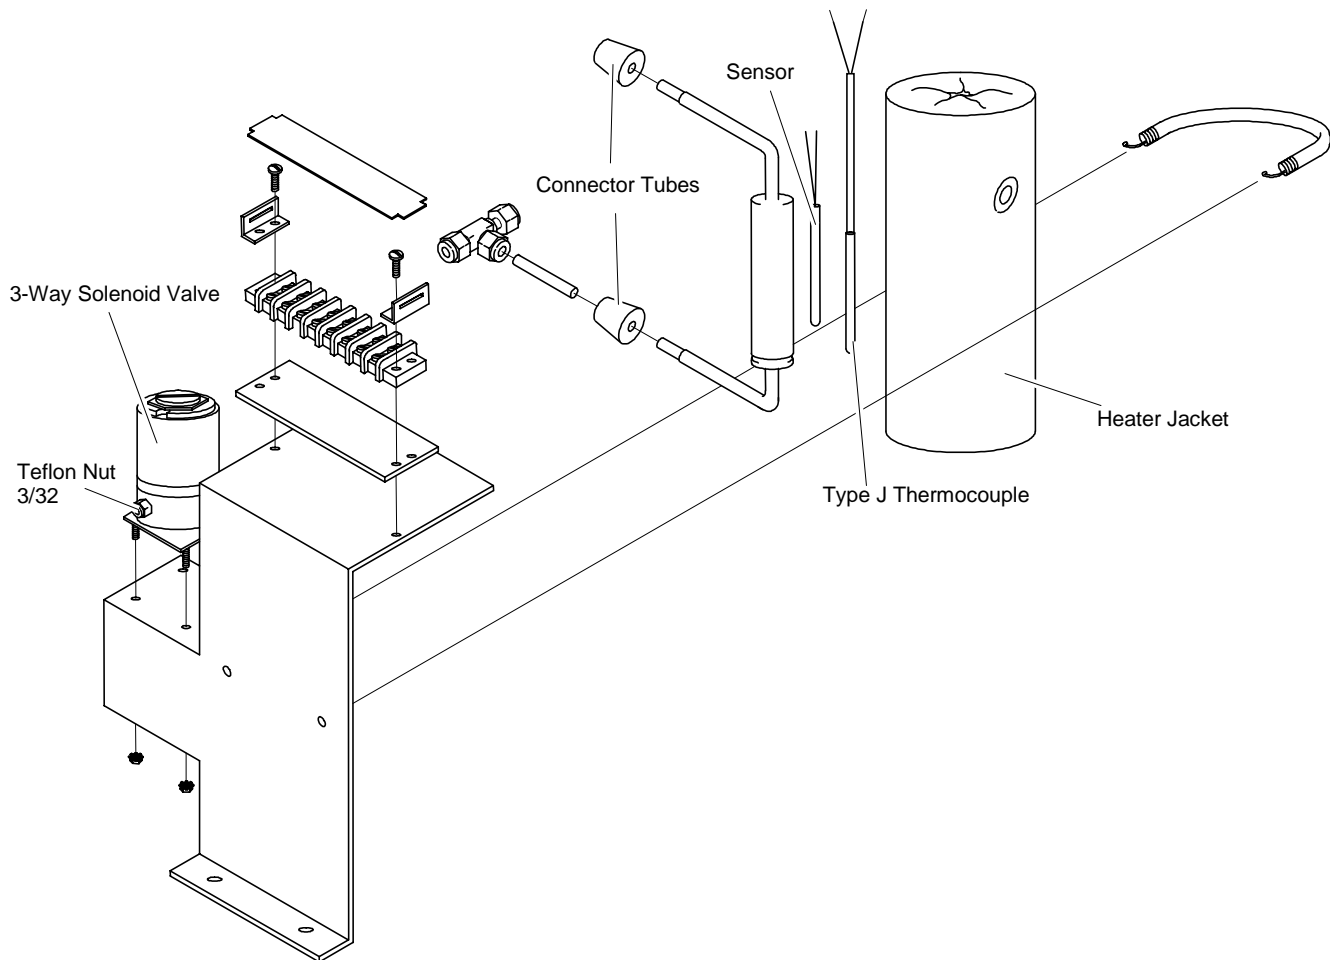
FRONT PANEL PNEUMATIC COMPONENTS
